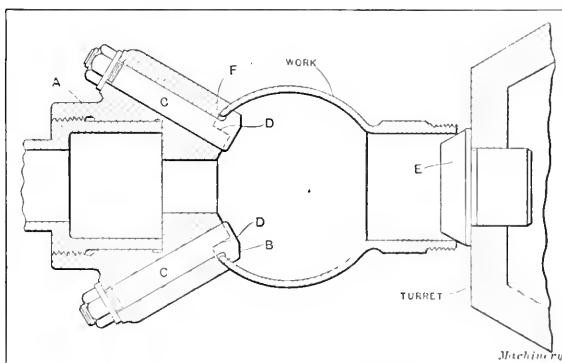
Fixture for Ball-and-socket Pipe Joint
